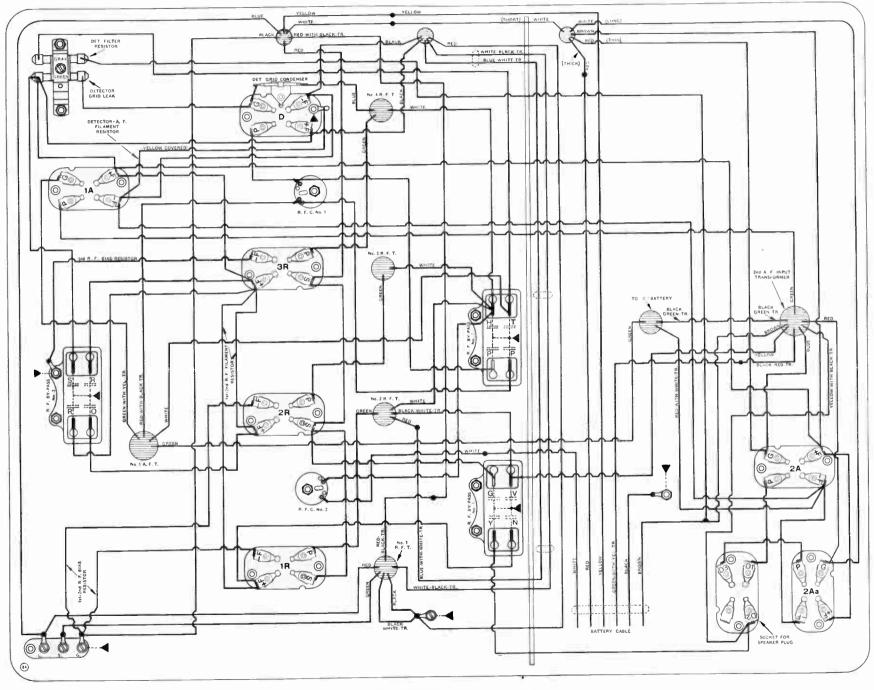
Bottom Wiring of Type Q-2 Chassis.
